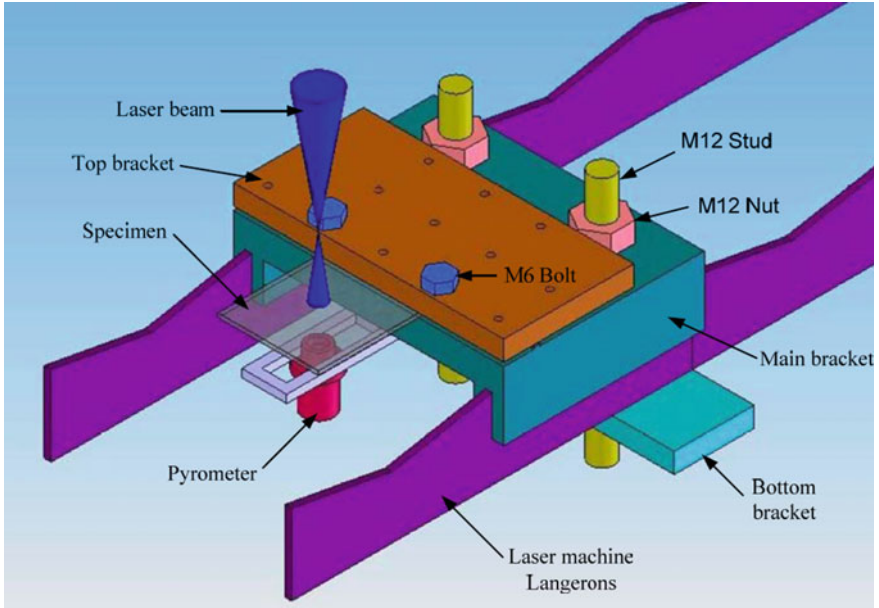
3-D model of fixture used to hold the workpiece on laser machine bed [11]
